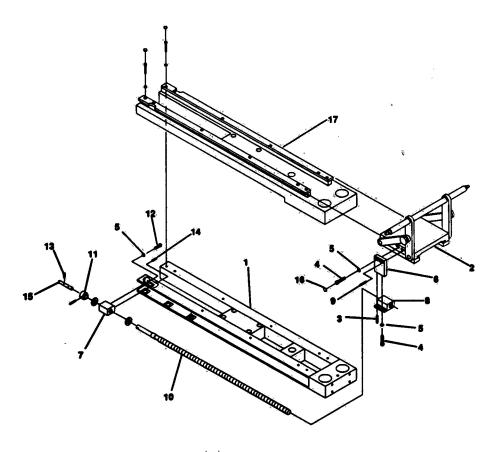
SPINDLE DRIVE ASSEMBLY.
